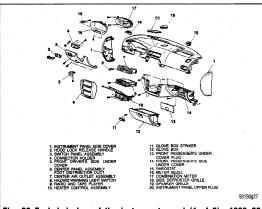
Exploded view of the instrument panel (1 of 2)—1999-00
